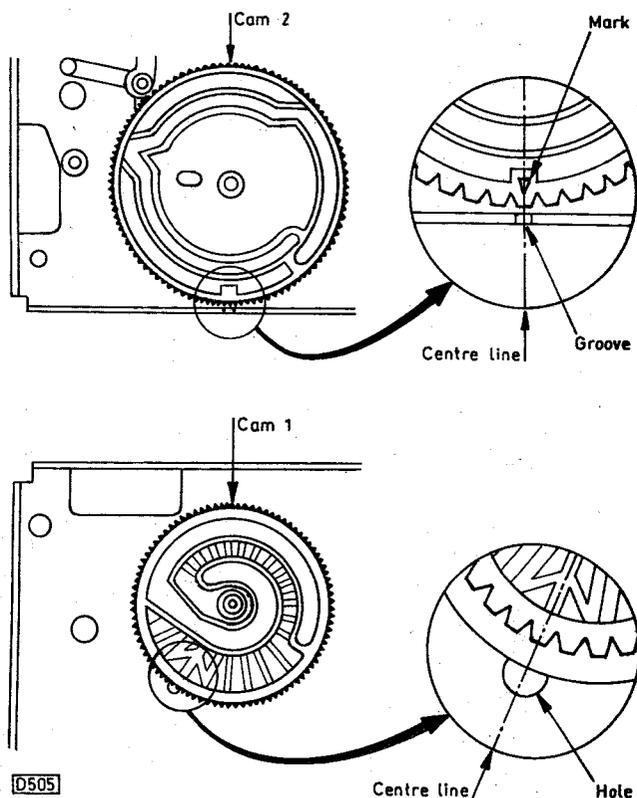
Correct alignment of Cam 1 and Cam 2.
